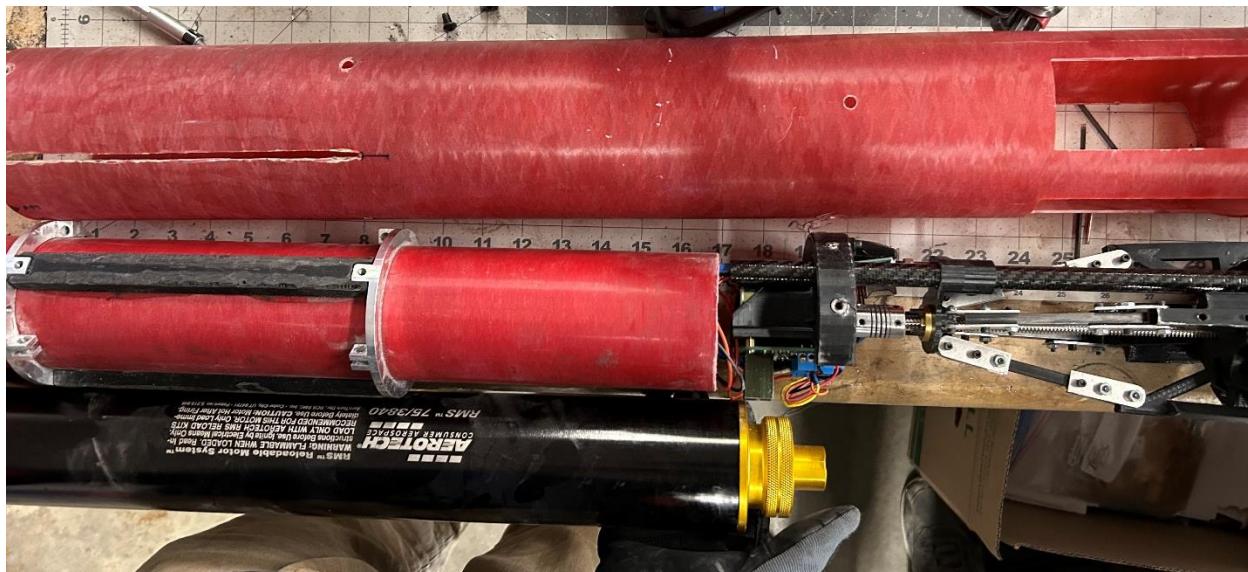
Aft section of the rocket showing that the secondary payload and motor do not fit.
